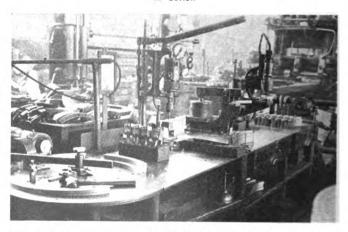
A general view of the bench where the rings are prepared for assembly—From left to right: The segment saw, sensitive drill, riveting press, riveting hammer and grinder
